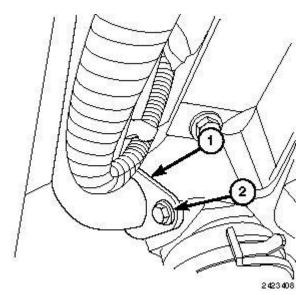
Front Coolant Tube & Bolt Courtesy of CHRYSLER GROUP, LLC
